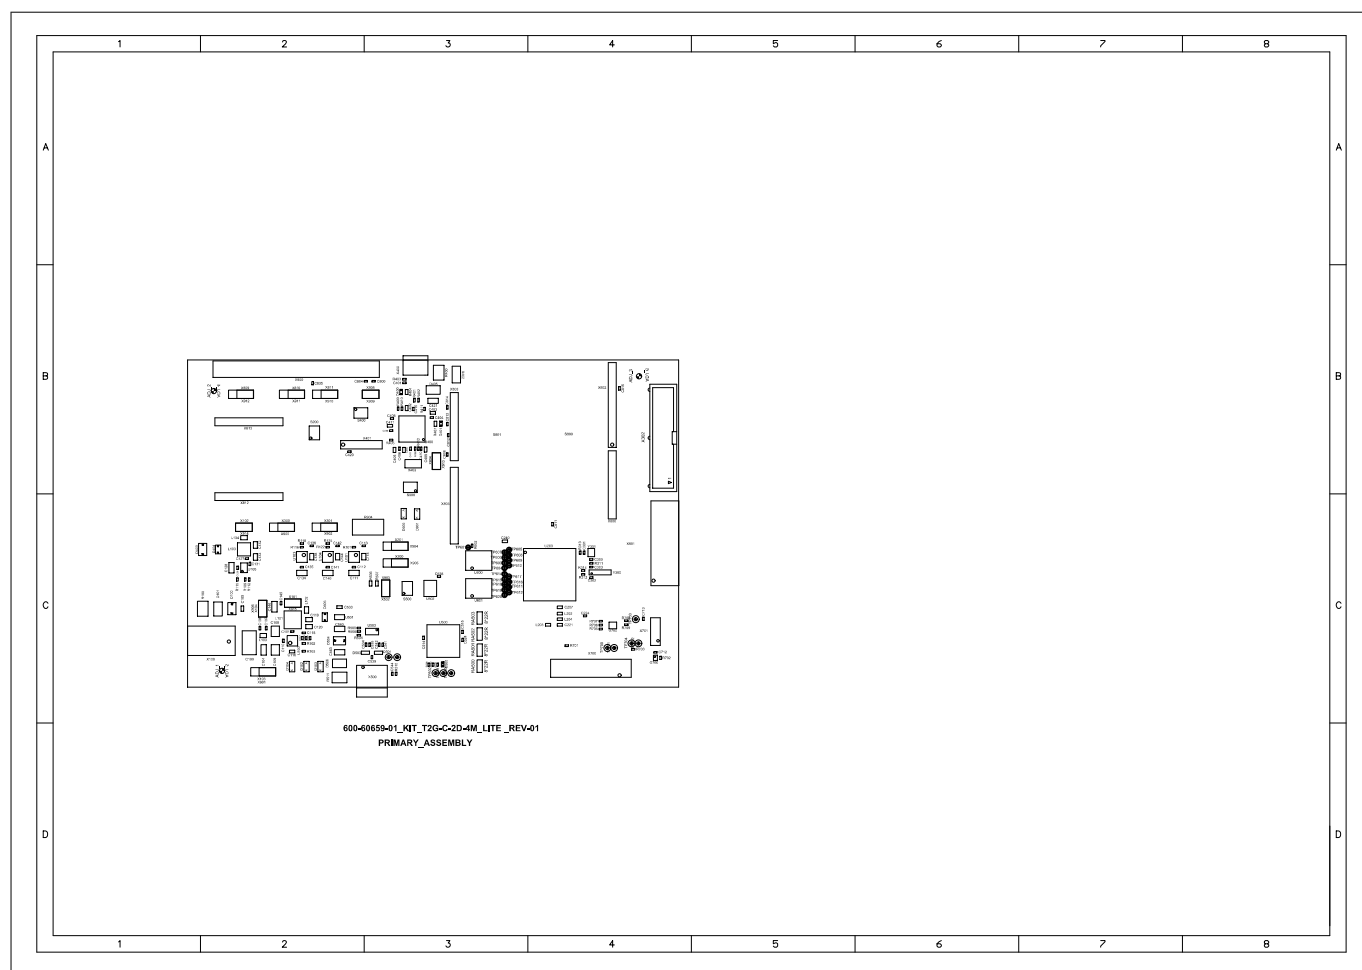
Primary side assembly of TRAVEO™ T2G Cluster 4M Lite Kit Rev-01
